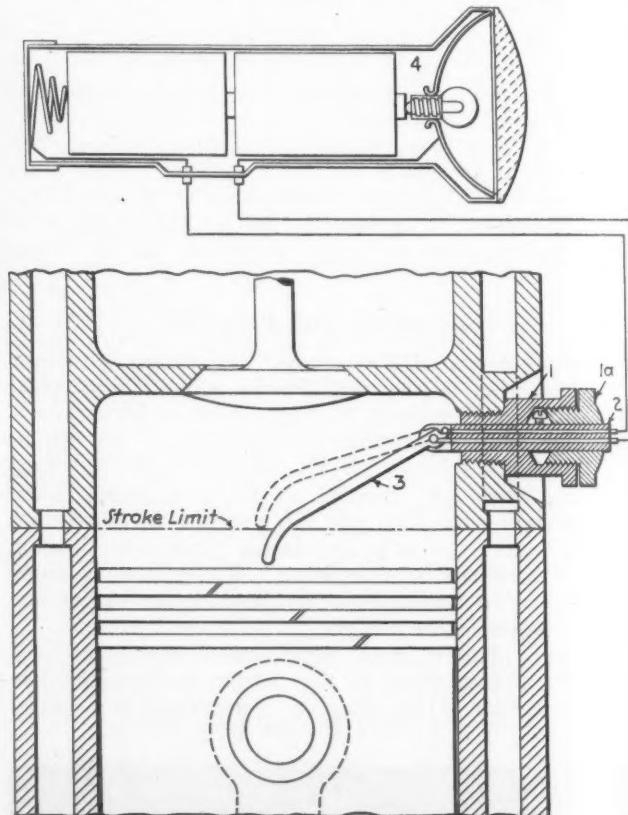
Device for locating dead centers and timing ignition of internal-combustion engines
